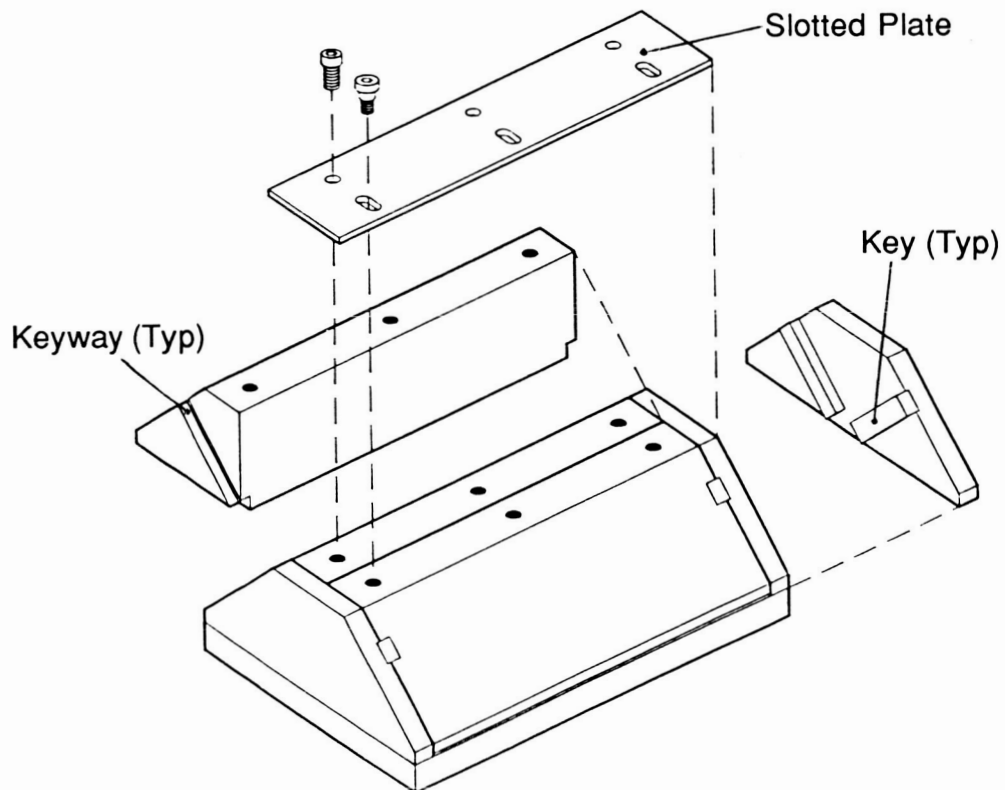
Modifications To Blade Element Tooling To Ensure Proper Pressure In Radius
